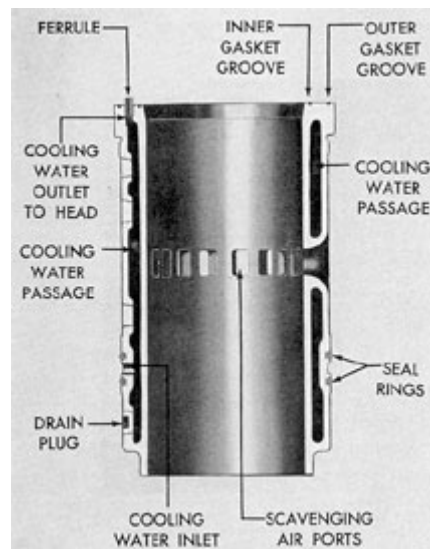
GM 8-268 cylinder liner cross section showing cooling water passages.
